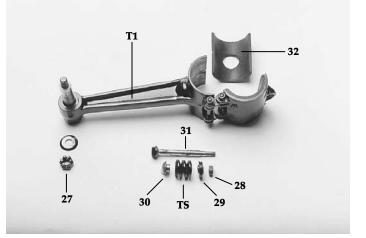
Frictional damper (T1) showing removable lining (32) and bolt with spring (Ts) to adjust tension of T1.
